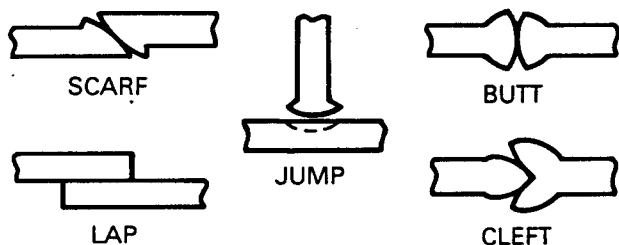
Typical Joint Designs Employed for Manual Forge Welding
